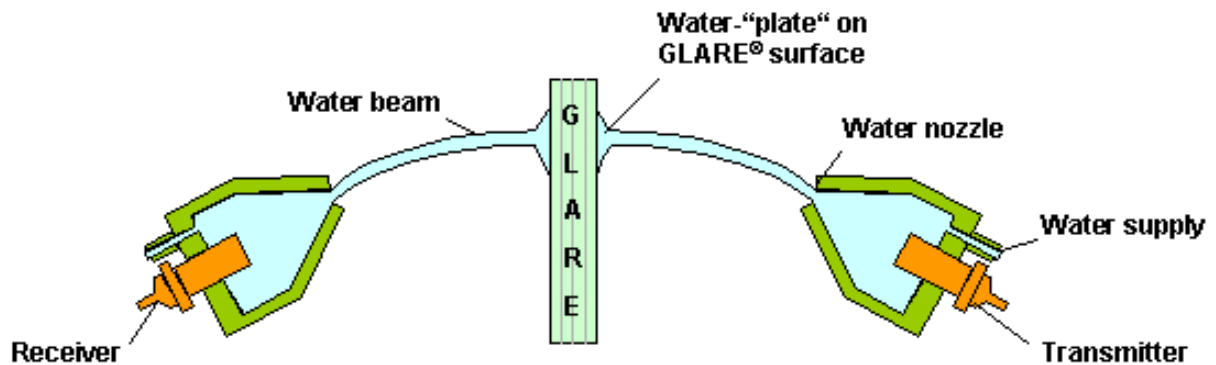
Squirter Ultrasonic method for testing of GLARE® sheets
